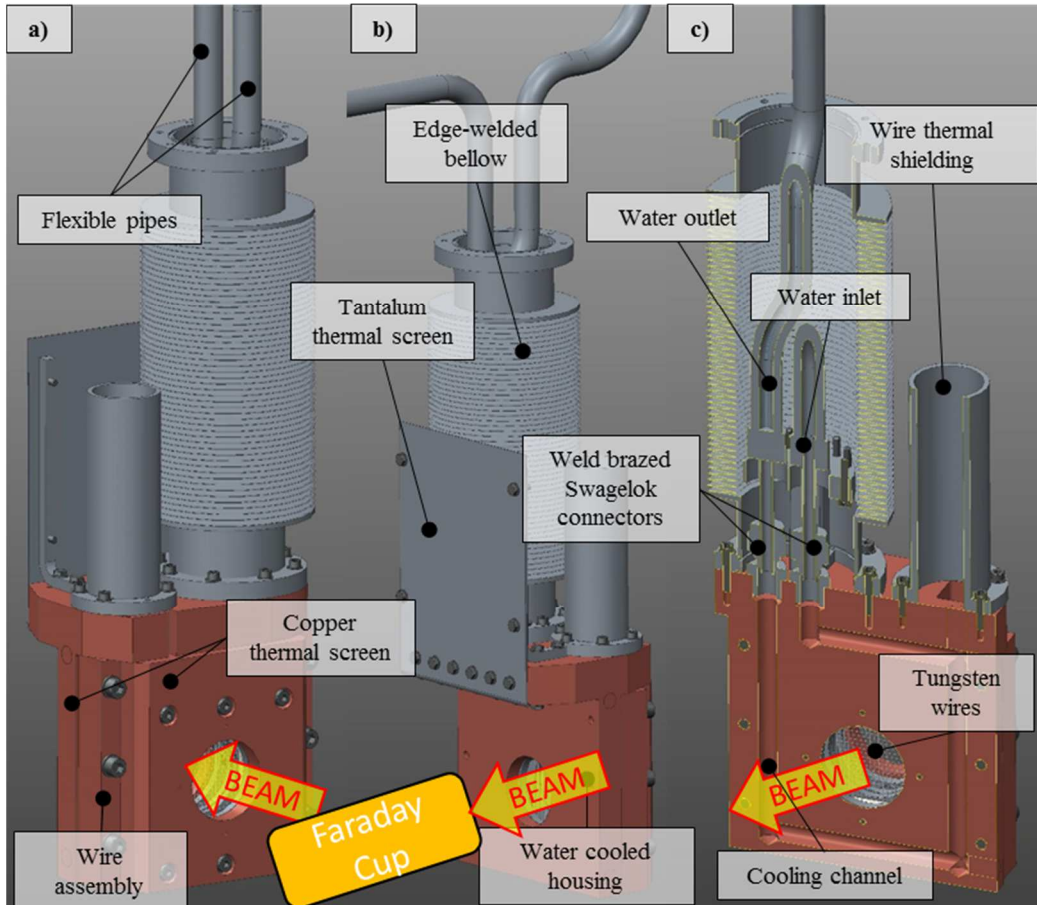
Wire assembly mounted to complete the beam profiler: a) beam profiler front view; b) beam profiler back view; c) section of beam profiler back view
